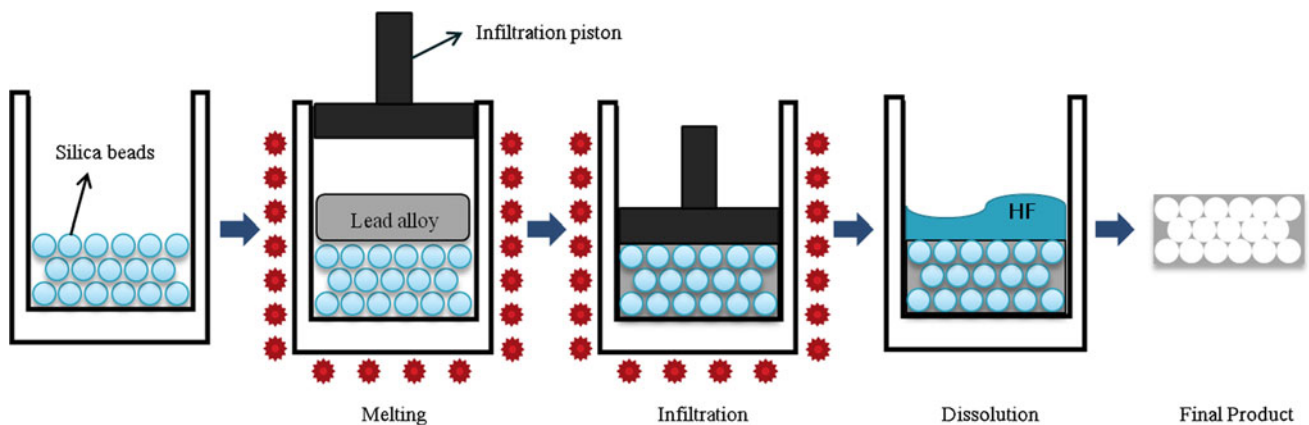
Schematic of the casting liquid metal around space holding fillers method
